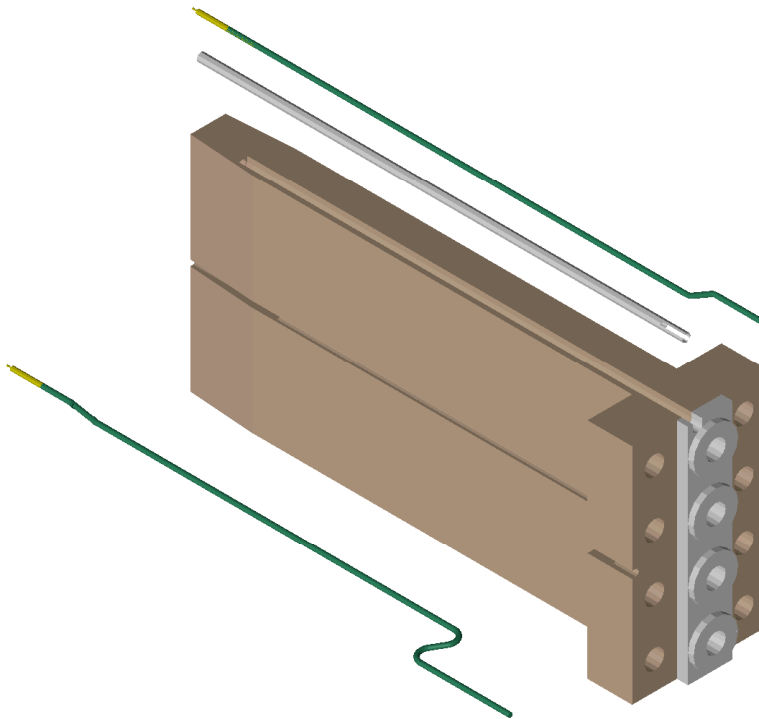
Mounting Schemes – Right Rear Iso Exploded View
